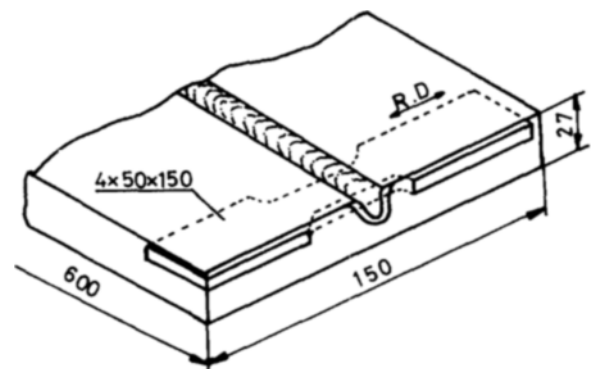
Welding plate configuration and extraction of specimen
